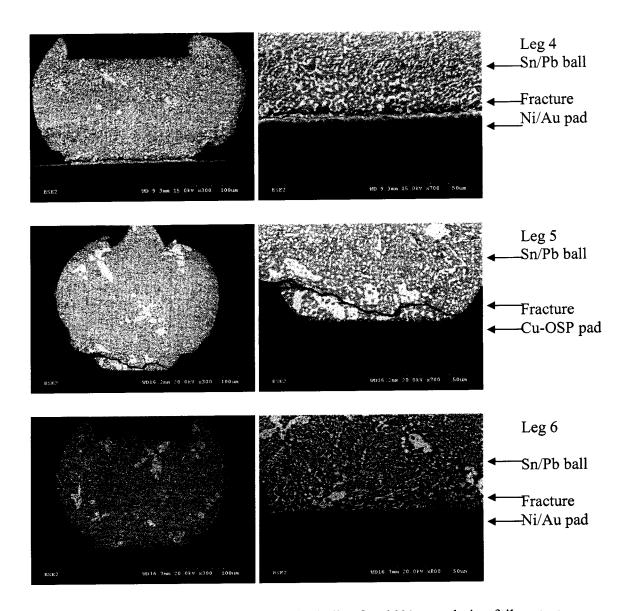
Cross-sections of failed solder balls after 80% cumulative failure test on zero-hour boards, face-up, Legs 4 - 6.
